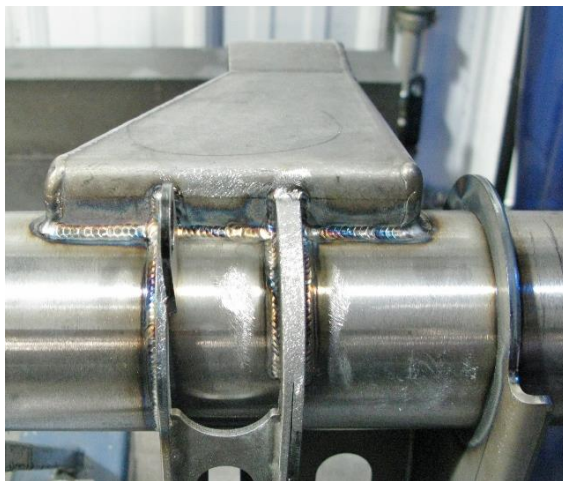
Finish Weld Track Bar Axle Bracket
